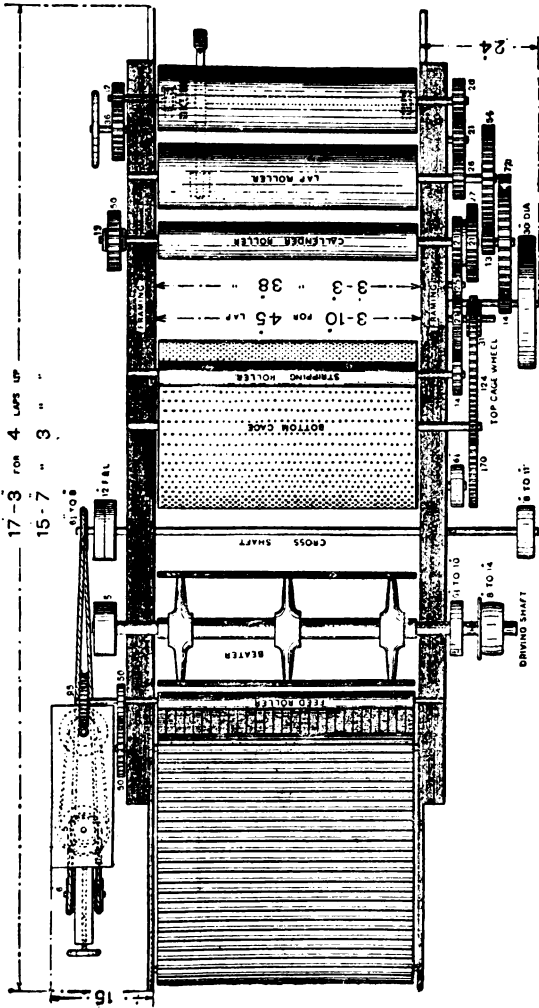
(a).—GEARING PLAN OF SCUTCHER.
